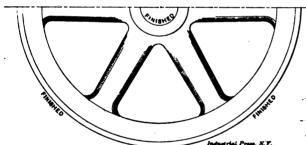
Countersbaft Clutch Pulley, showing Surfaces to be Machined
